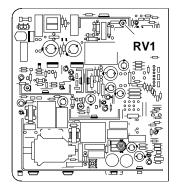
Voltage adjustment on pre-amplifier board socket
